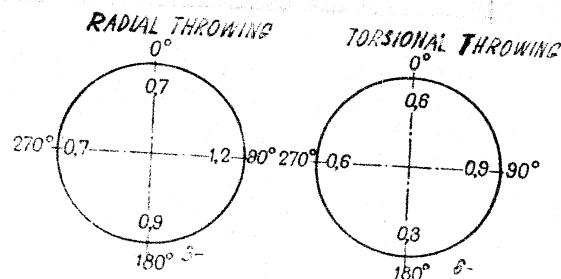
Scheme of the remarks while aligning the engine and generator shafts.
